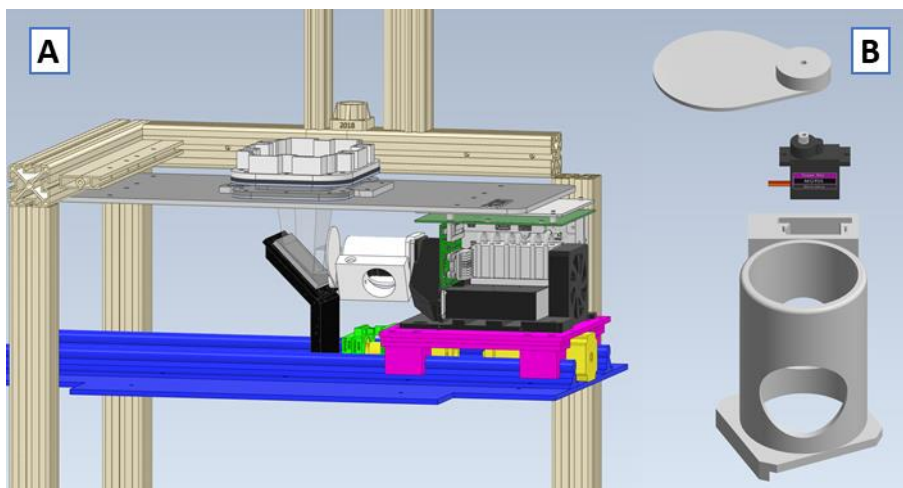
Projector mounting. A) Projector support (blue) with projector carriage (magenta), linear transmission system (yellow) and optical end-stop used to control focus position (Black and grey); a mirror tilted at 45° is fixed to a 3D printed support (black) just below the vat; Part of the original structure is removed for visibility purpose; B) exploded view of the mechanical shutter.
